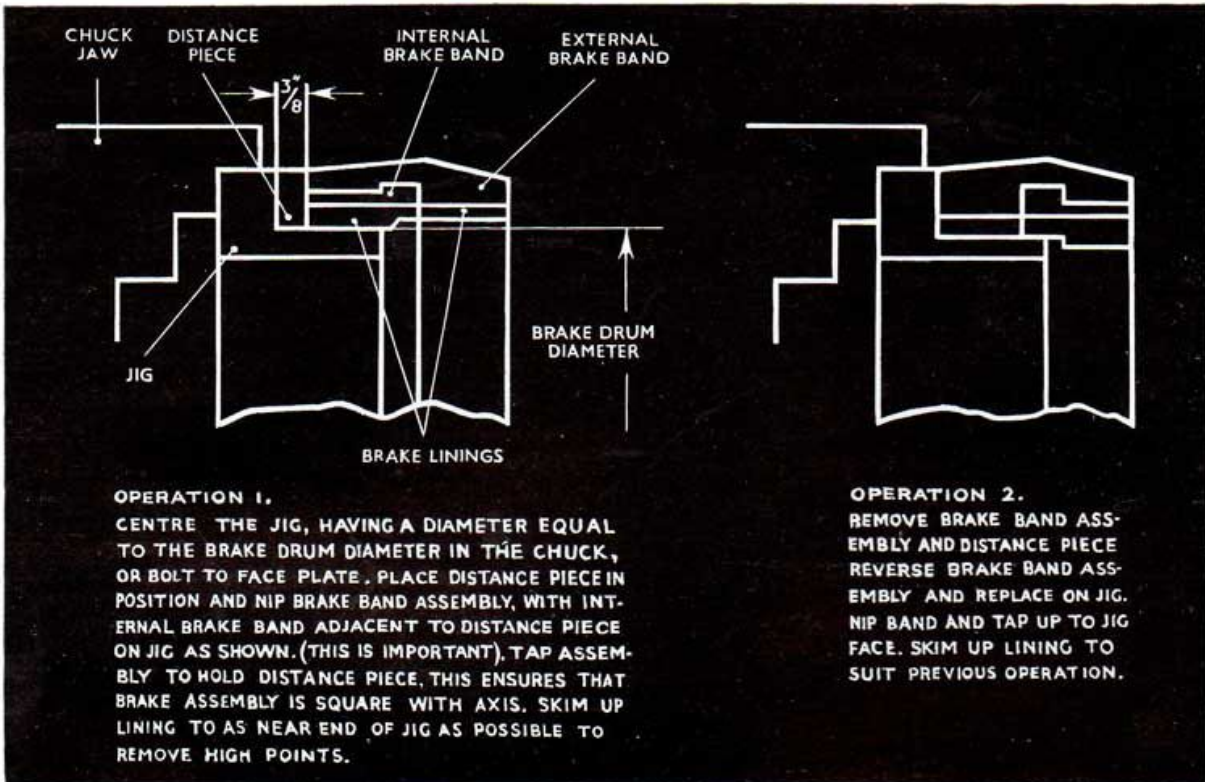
METHOD OF SKIMMING BRAKE LININGS.
